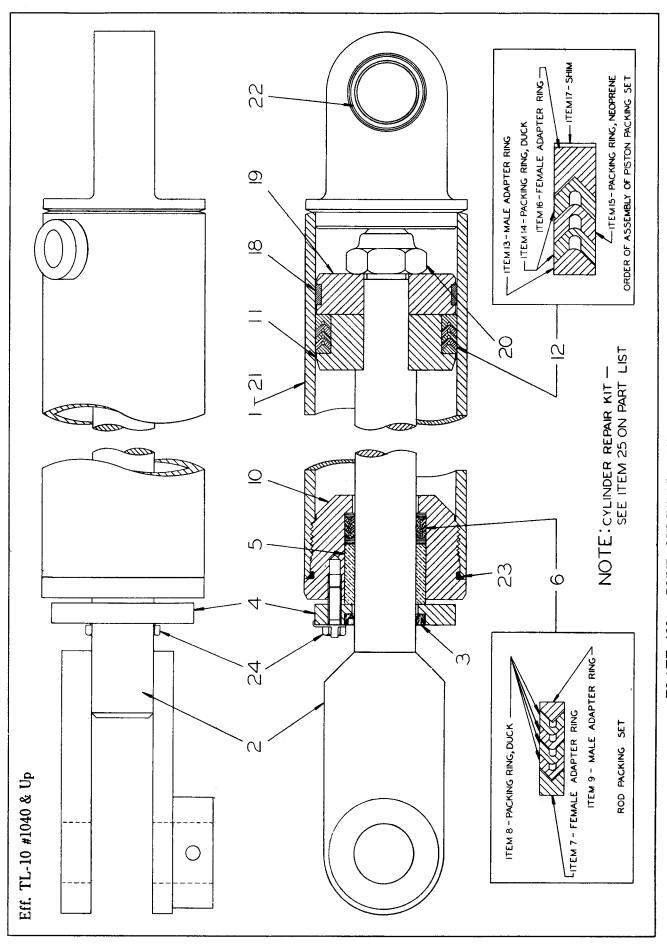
DUMP CYLINDER ASSEMBLY - LEFT AND RIGHT
